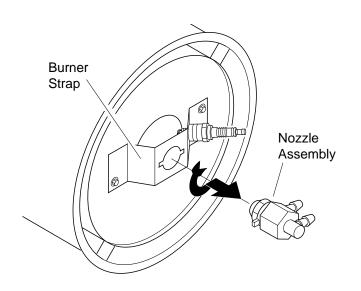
Removing Nozzle Assembly, 8,8 kW (30,000 Btu/Hr) Model
